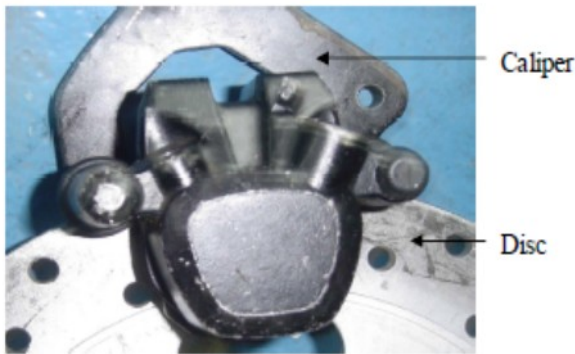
Single Piston Floating Type Calliper- sports motorcycle
